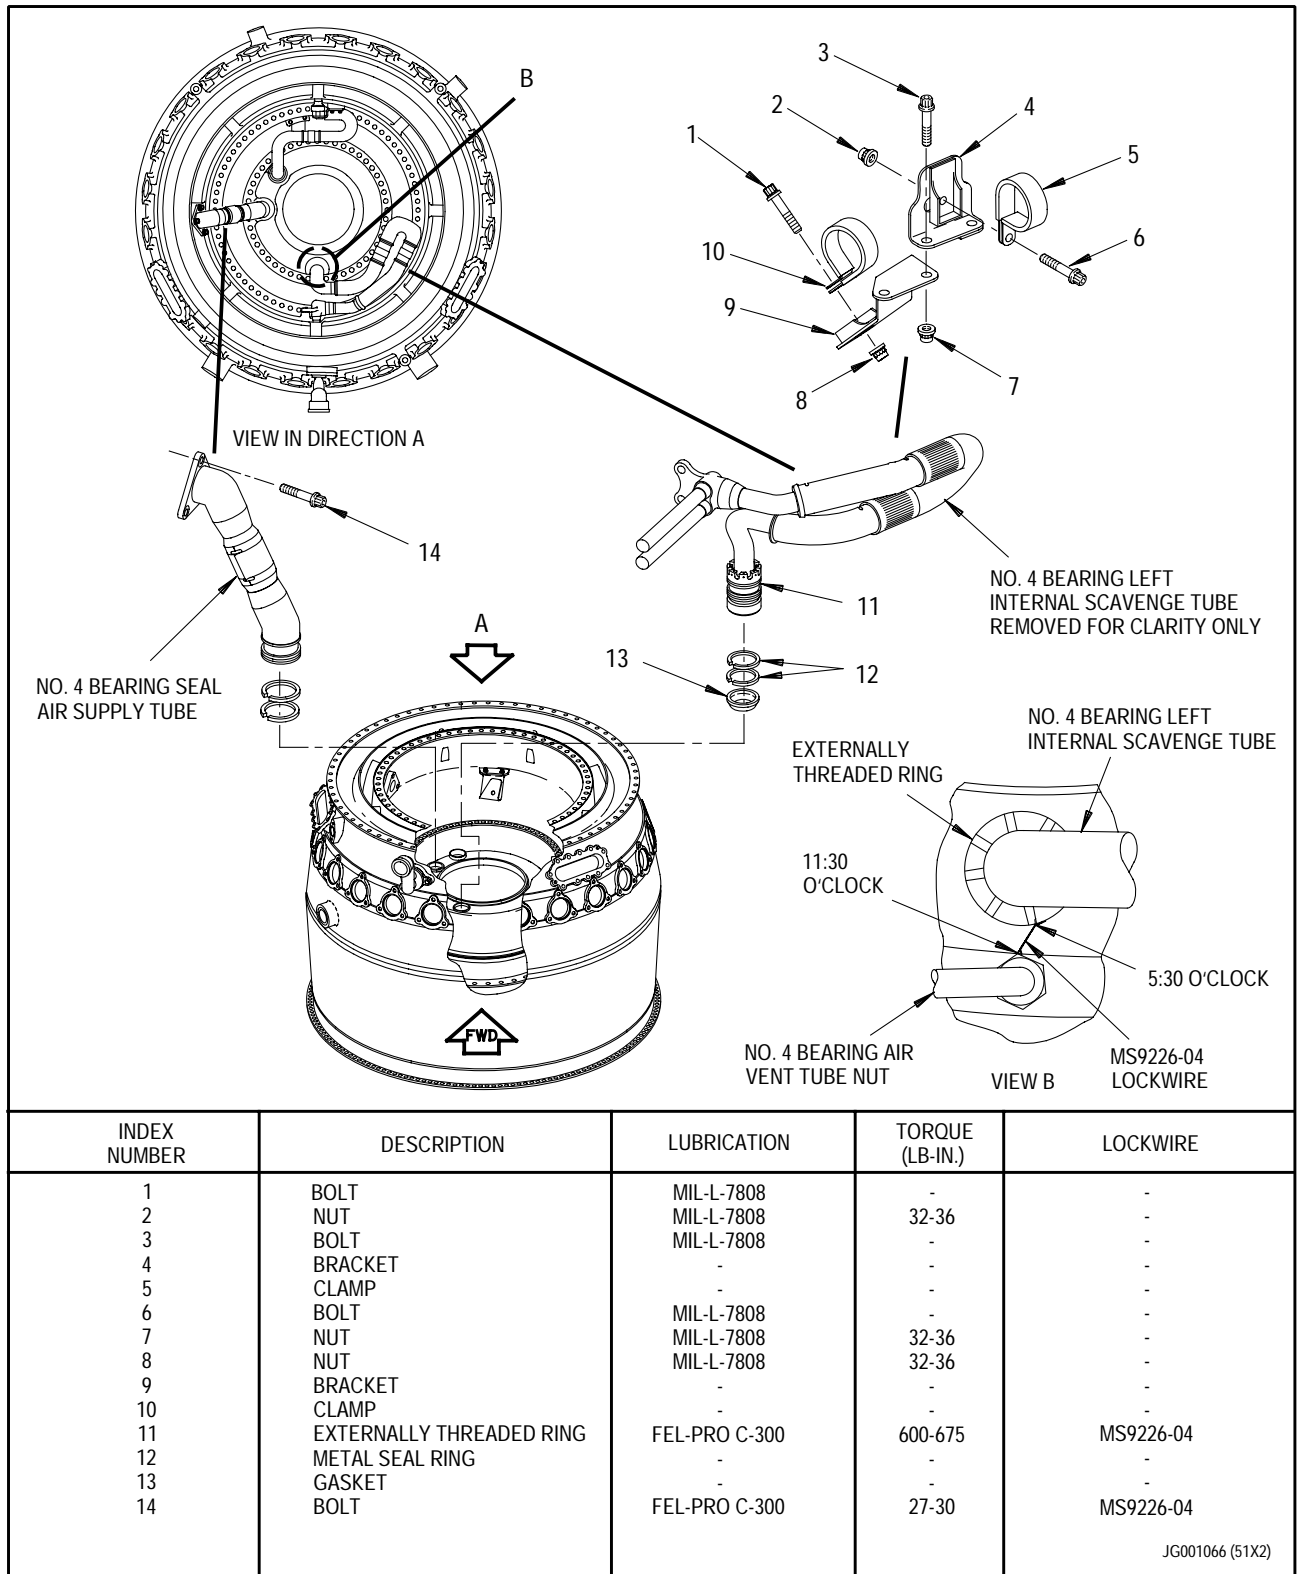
No. 4 Bearing Internal Scavenge Tube and No. 4 Bearing Seal Air Supply Tube - Installation
